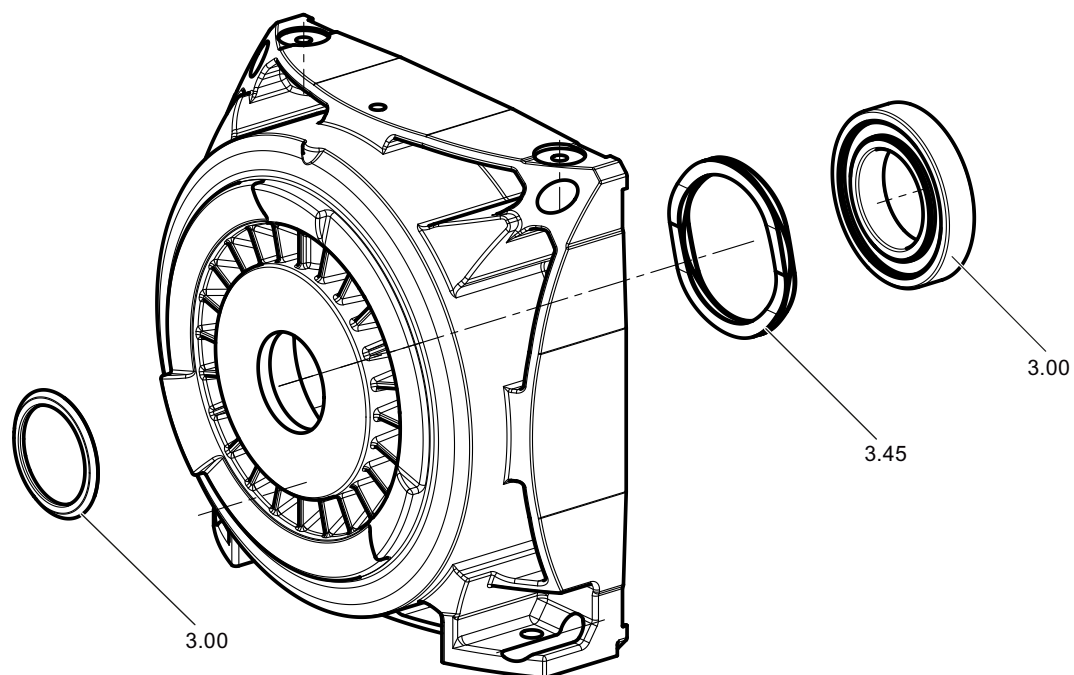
Rolling-contact bearing bush drive end, with coupling output, with permanent lubrication
